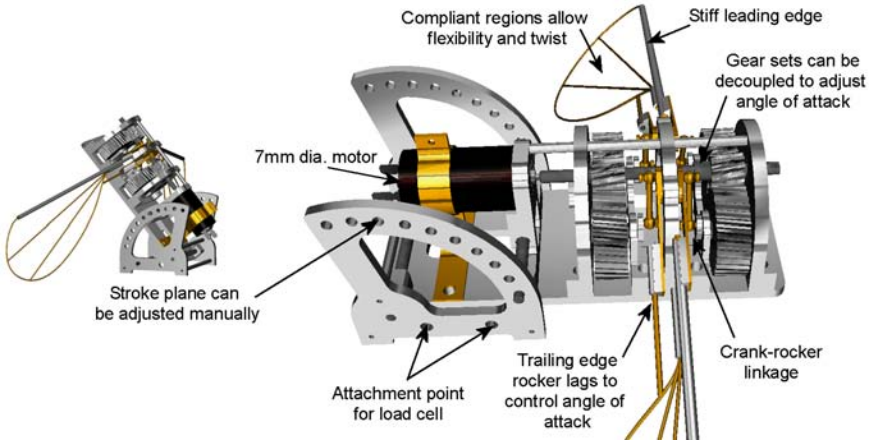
CAD view of mechanism test-rig assembly with key features labelled.
